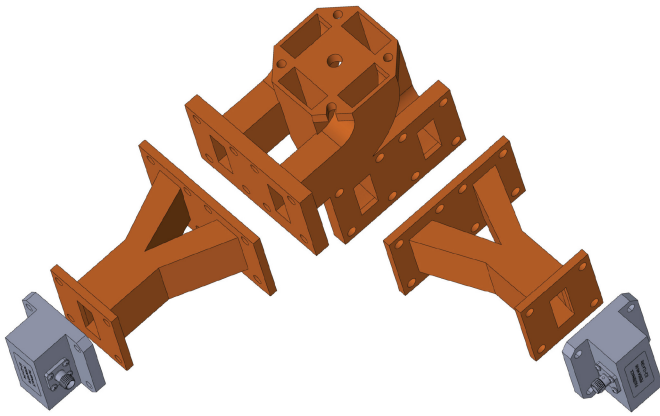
Exploded assembly of the waveguide splitters, waveguide launchers, and the feed bend from Fig. 2.
